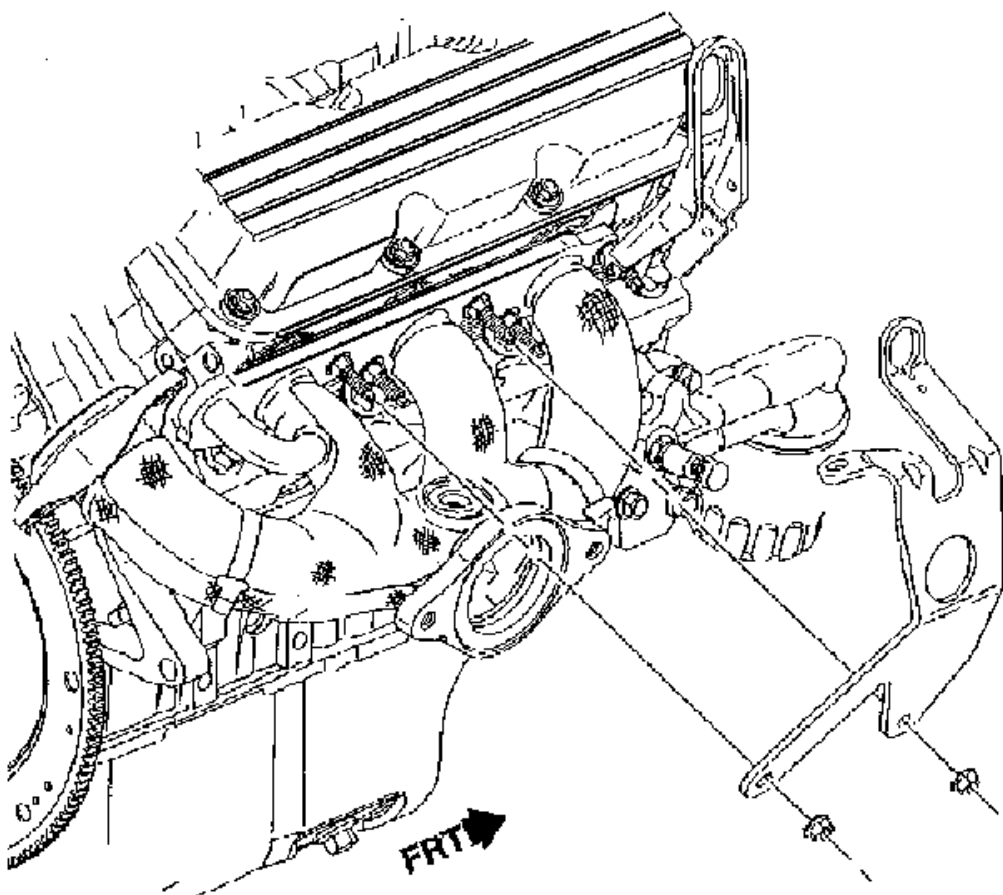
View of Fuel Injector Sight Shield Mounting Bracket
